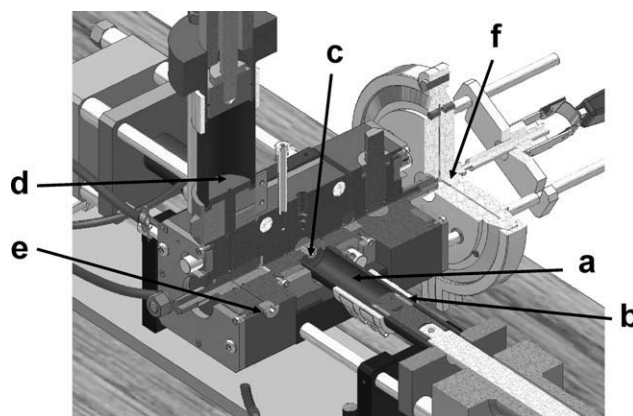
Three-dimensional view of the mixer: (a) chamber, (b) piston with seal, (c) mixing element, (d) feeding unit for melts, (e) feeding channel for liquids, and (f) mold.
